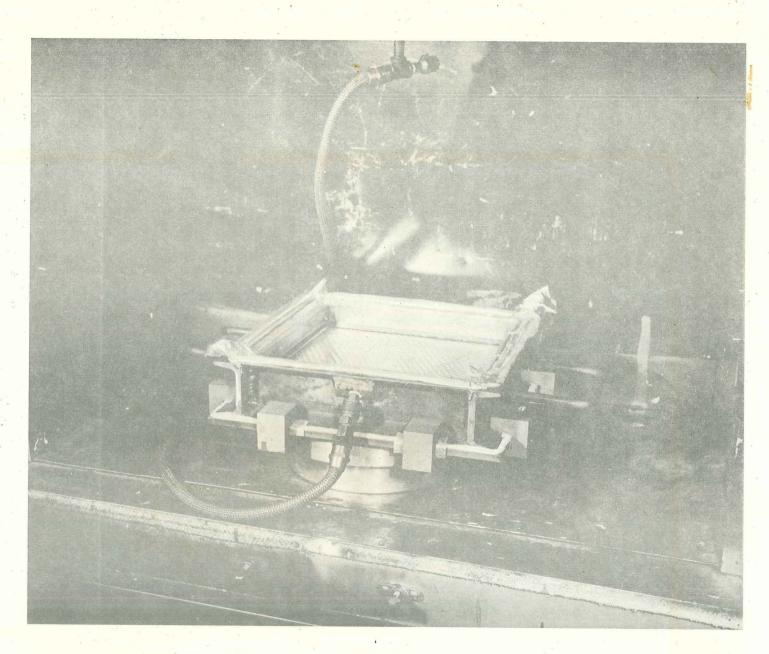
Sub-scale Cure Form, with Honeycomb -Face Skin Bonded in Place, Ready For Removal From Vacuum Equipped Cure Oven.
